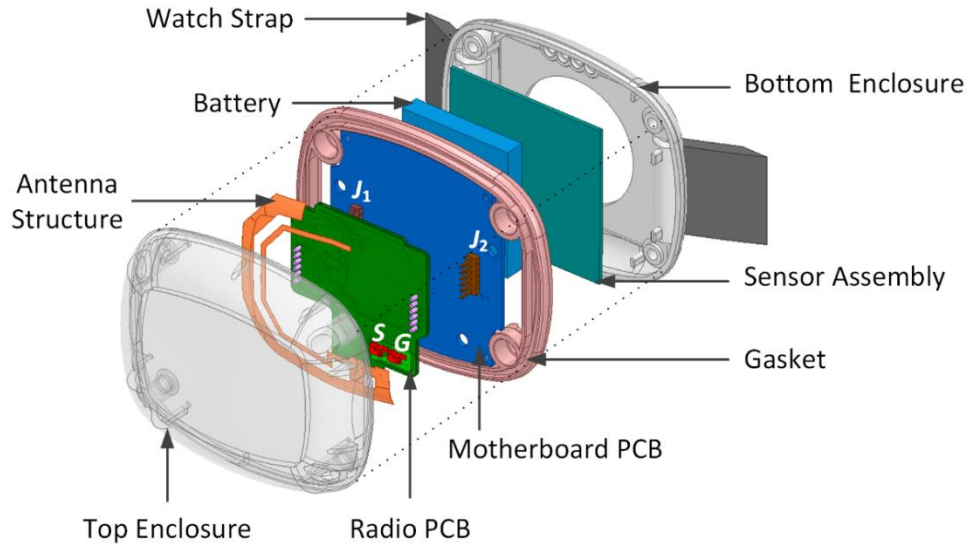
Exploded view of the wristwatch wireless sensor device.
